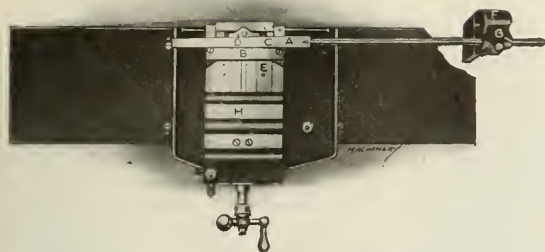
Taper Attachment for Porter-Cable Manufacturing Lathe
